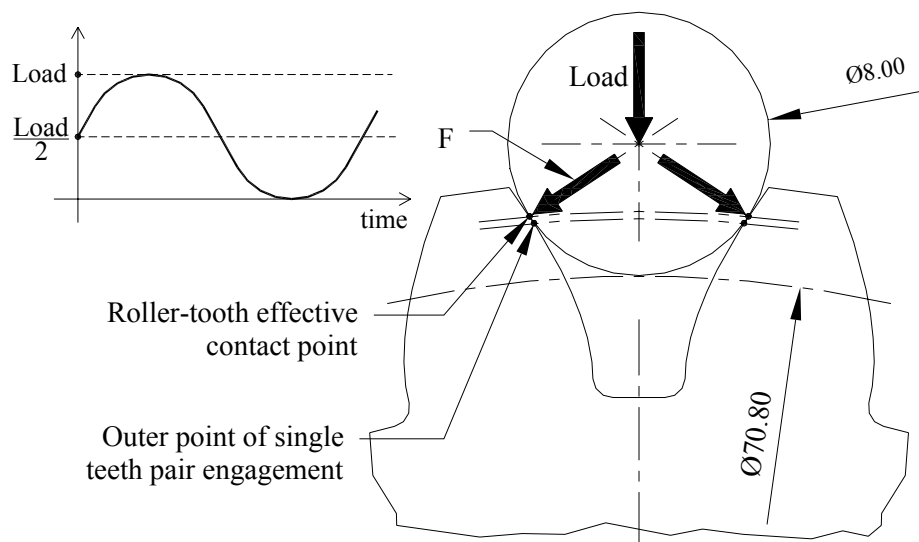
Load application scheme for the contact fatigue tests performed on steel alloy spur gears [3.50].
